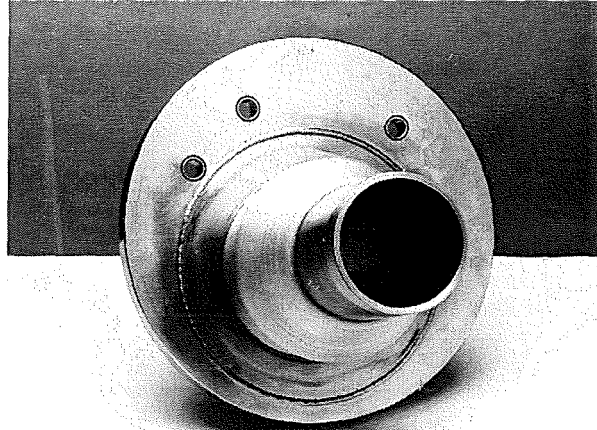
Radial insulation break welded by electron beam welding in the eccentric flange.
